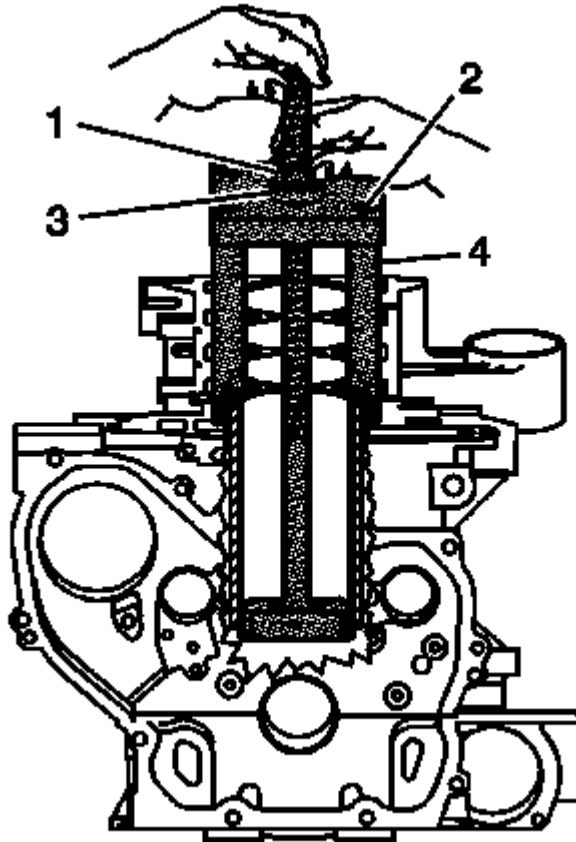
Aligning Cylinder Bore Sleeve Puller
